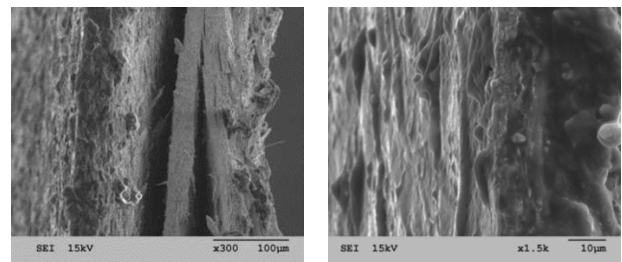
Fracture surface of the tungsten weld aluminum layer
